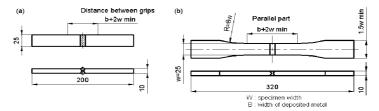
Fatigue test specimen, (a) without cut-offed bead, (b) with cut-offed bead
